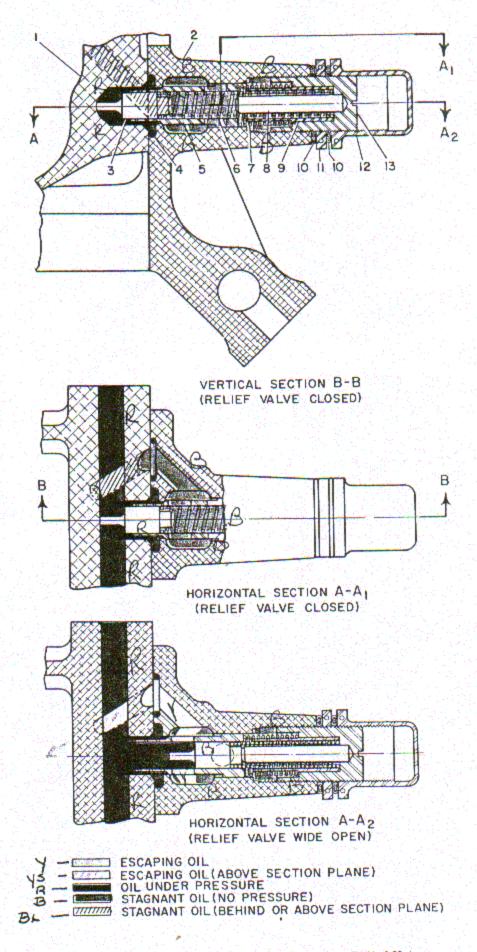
Construction and Action of Low Oil Pressure Relief Valve
